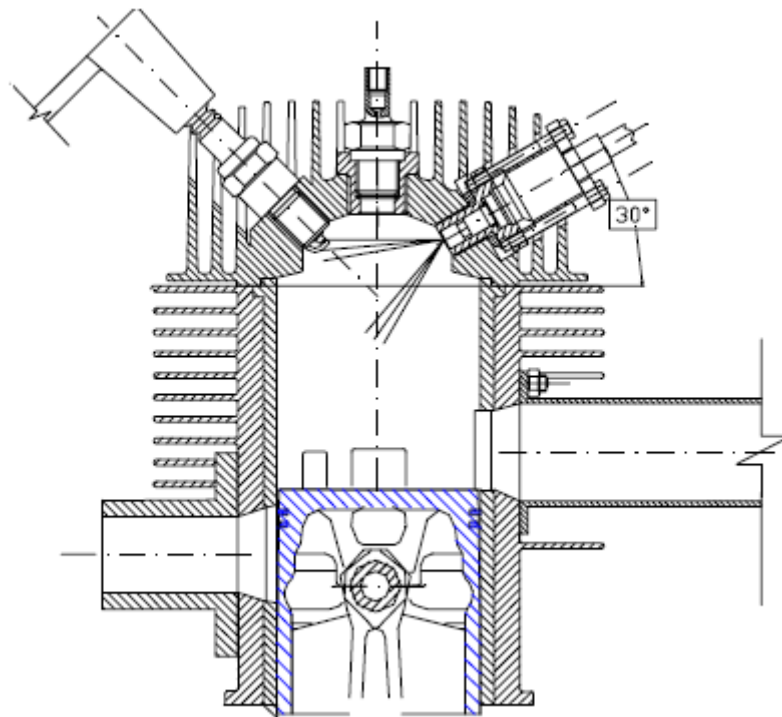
Cutaway view of the modified engine for gasoline direct injection (M. Badami 1999)
